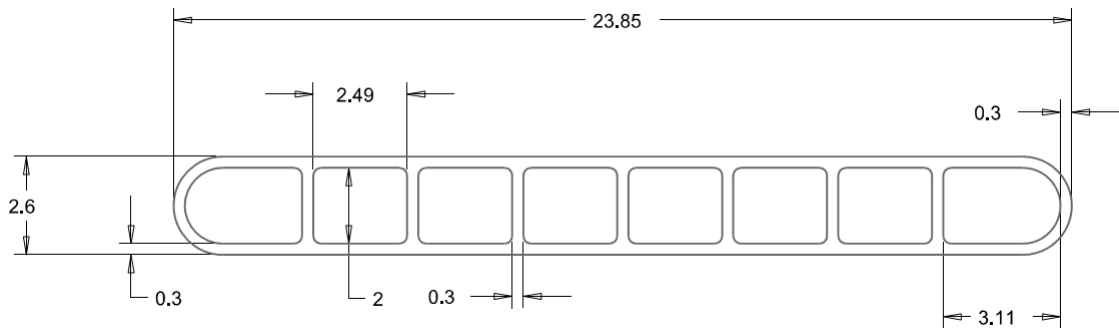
Copper minichannel tube design #1. Dimensions in millimeters.
